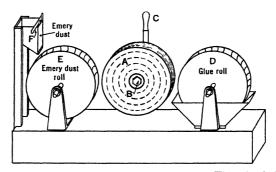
Schematic drawing showing coating machine. The wheel A to be coated is mounted on power-driven shaft B, which is attached to lever C. By swinging lever to right it makes contact with glue roll D, which coats circumference of wheel. Lever C is then swing to left and makes contact with roll E, which coats wheel with emery. The lever at F controls the amount of emery dust which is fed onto roll E.
